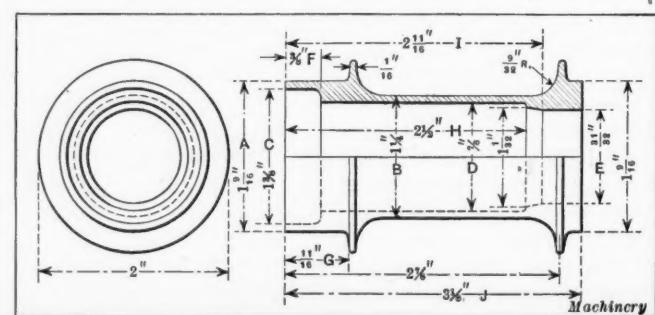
Bicycle Wheel Hub which can be successfully inspected by Method shown in Fig. 8
